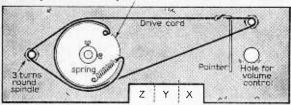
Details of the positioning of the dial drive for the tuning capacitor.
